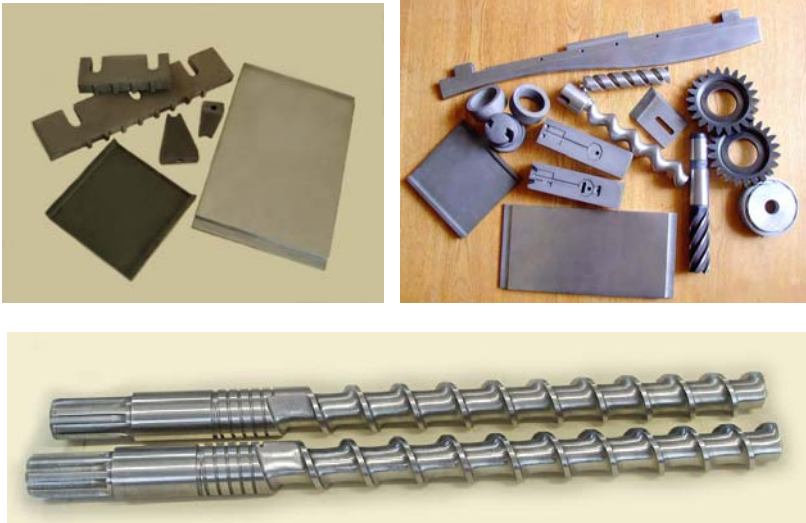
Some types of industrial equipment and the cutting tool with coverings on the basis boron
